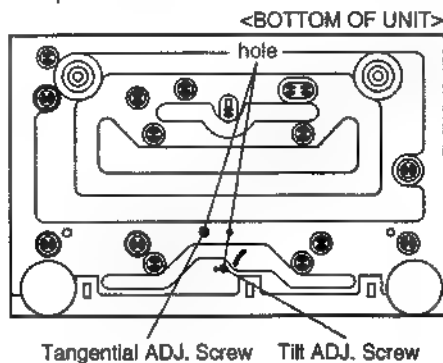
Adjustment Hole of the Bottom Plate
